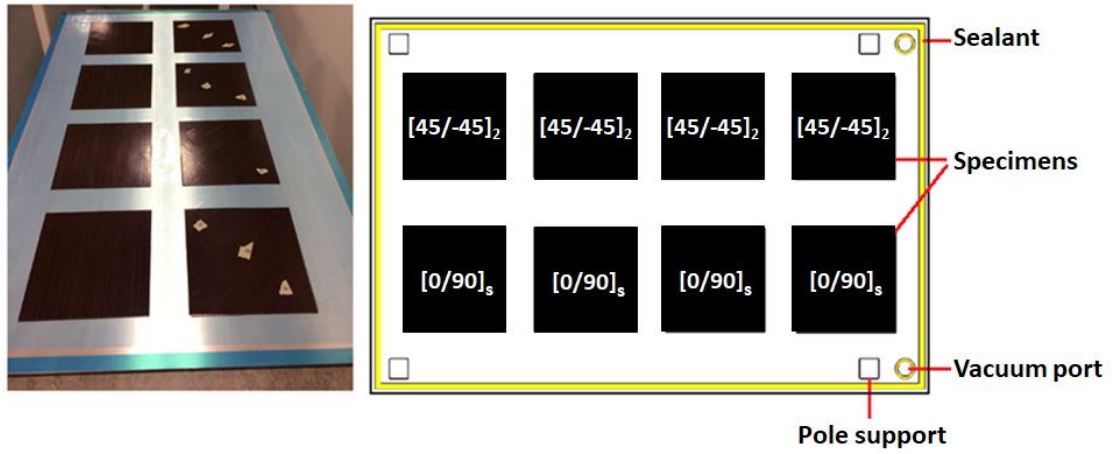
Arrangement of laminate specimens on a mould plate.
